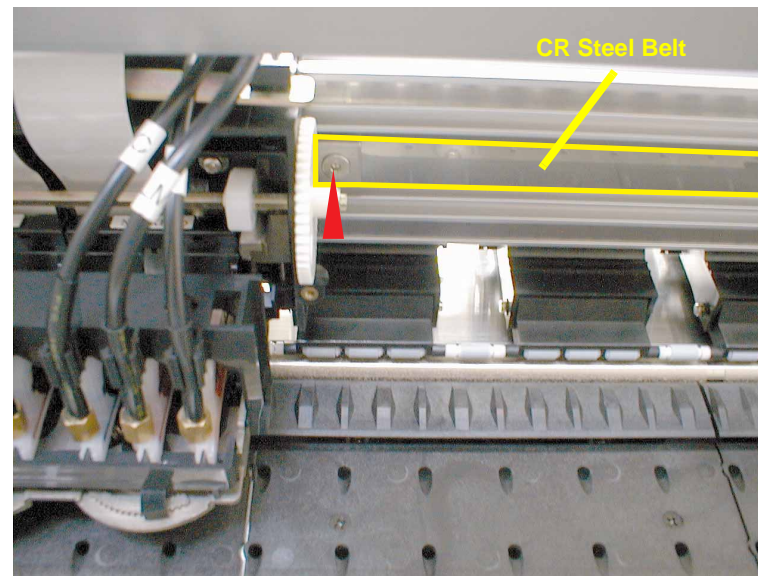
CR Motor Removal & CR Steel Belt Loosening
